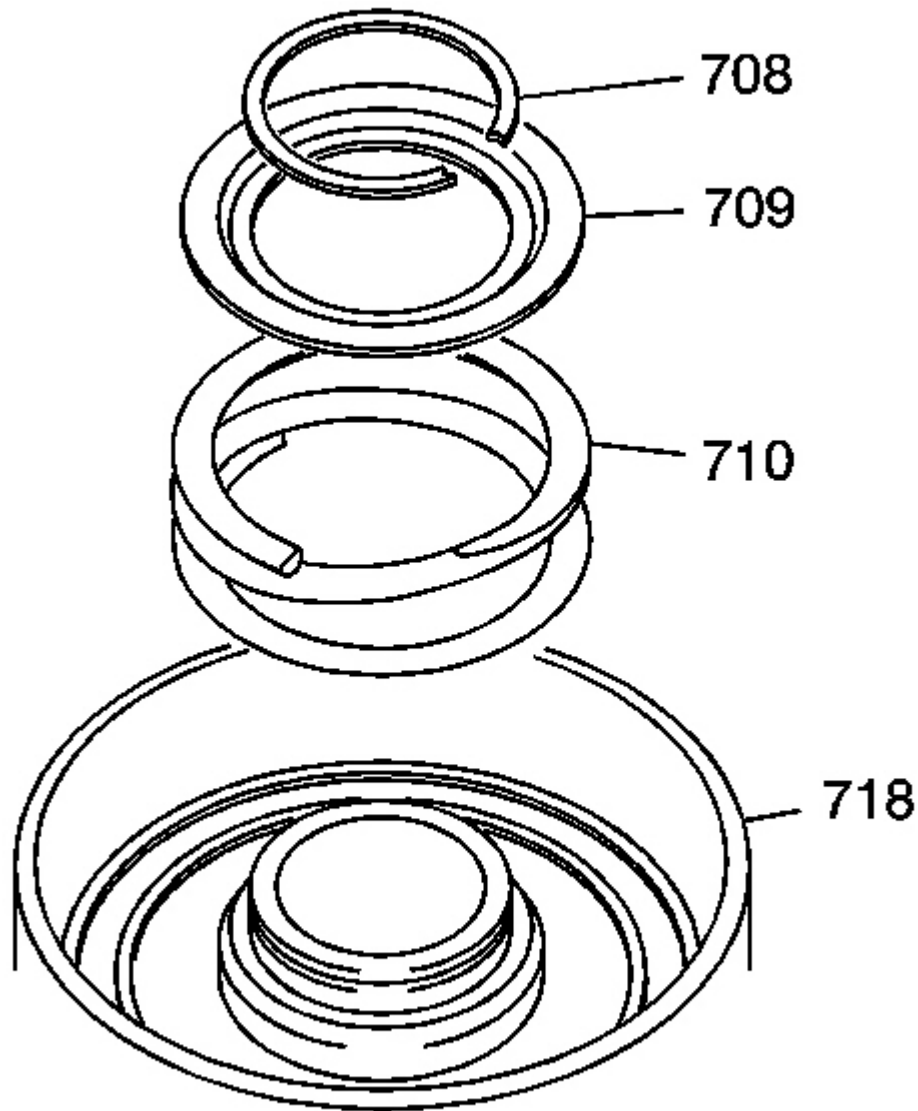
Retaining Ring, Return Spring Cap & Clutch Return Spring Removed
